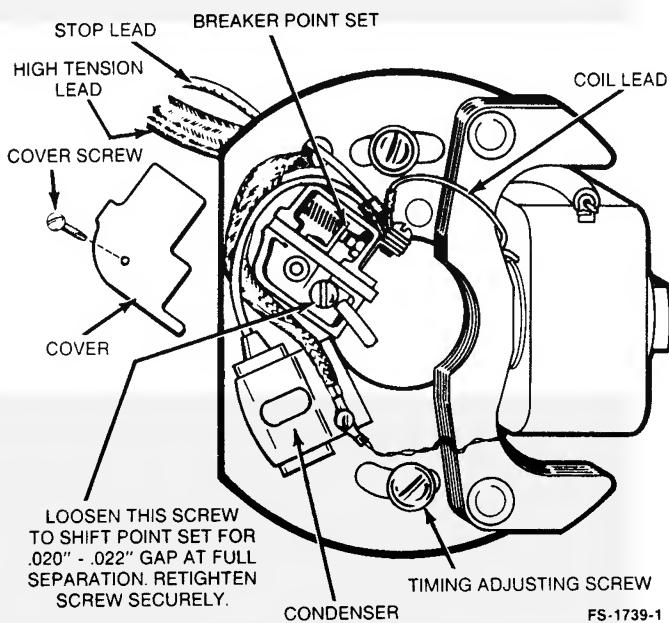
MAGNETO IGNITION SYSTEM
